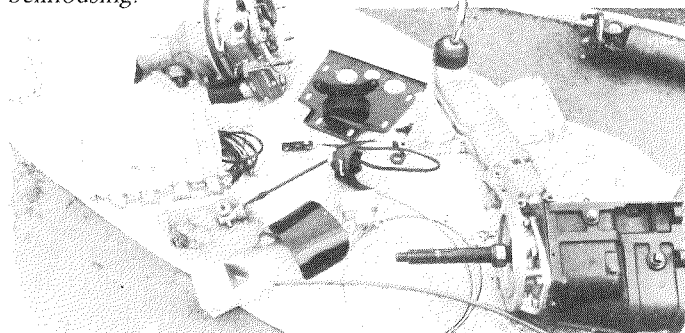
The selection of bits to be fitted: gearbox, overdrive, new chassis plate and rubber mounting, angled speedo drive plus longer cable, electrical bits and pieces and a revised gearlever extension due to the fitting of an inhibitor switch, the end shaft on the extension is longer than standard and has a transverse hole to take the inhibitor cam securing pin. Of course, I fitted the cam the wrong way round and then spent another 20 minutes taking it off and refitting it.
